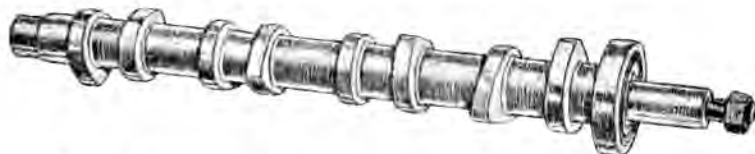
THE CAMSHAFT EMPLOYED ON THE MINOR IS OF GENEROUS DIMENSIONS AND CARRIED ON BALL AND ROLLER BEARINGS
